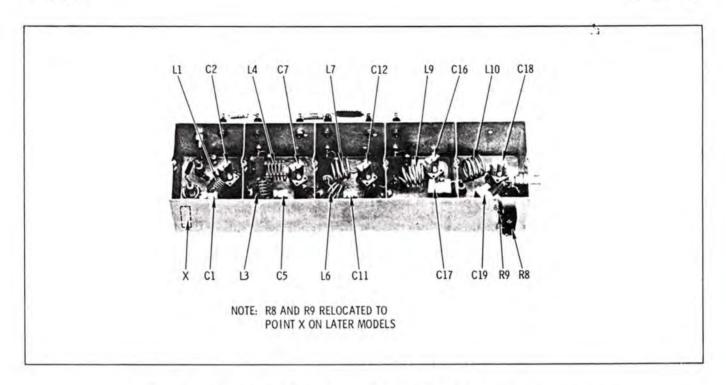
RF Amplifier Assembly Top View (Cover Removed)
